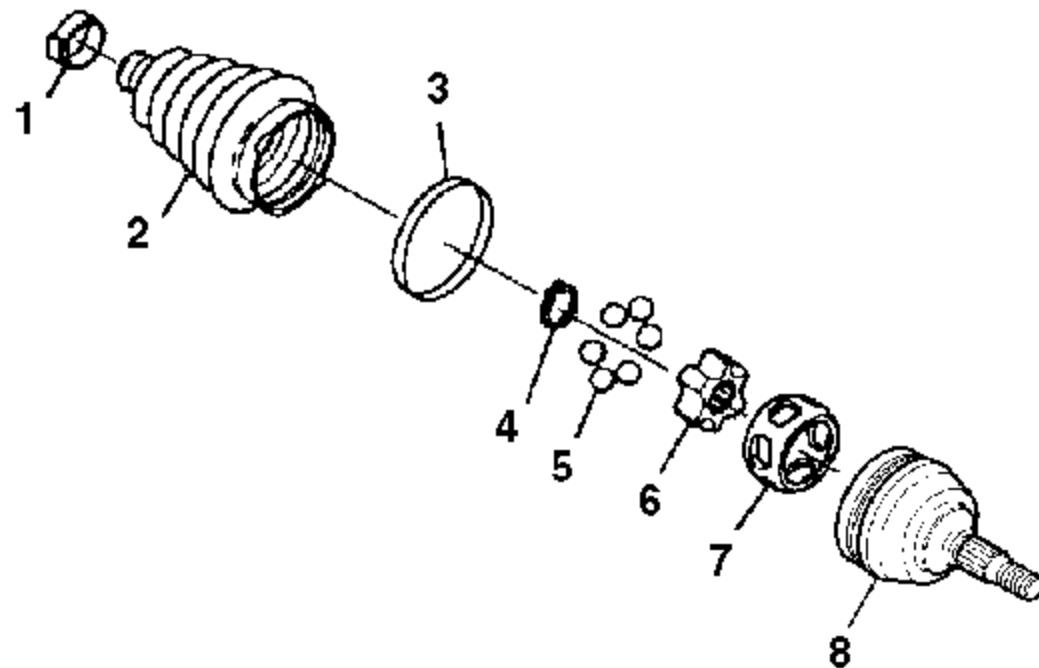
Exploded View Of Wheel Drive Shaft Outer Joint
